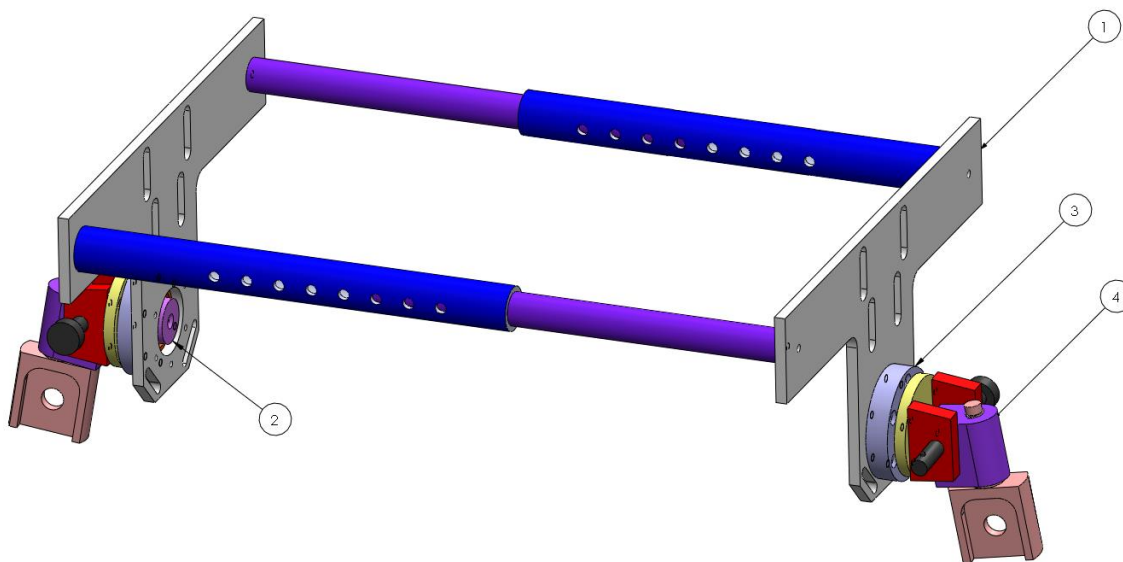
Final design of the hip frame (contrast with Figure 7). In this version the hip plates have been combined with the frame bar to make a T-shape (1) and the bearings have been moved to a more distal location (2 and 3). This assembly also shows the hip joint (4), discussed below, attached to the frame bar. Figure 9 shows a subject wearing the exoskeleton hip frame.
